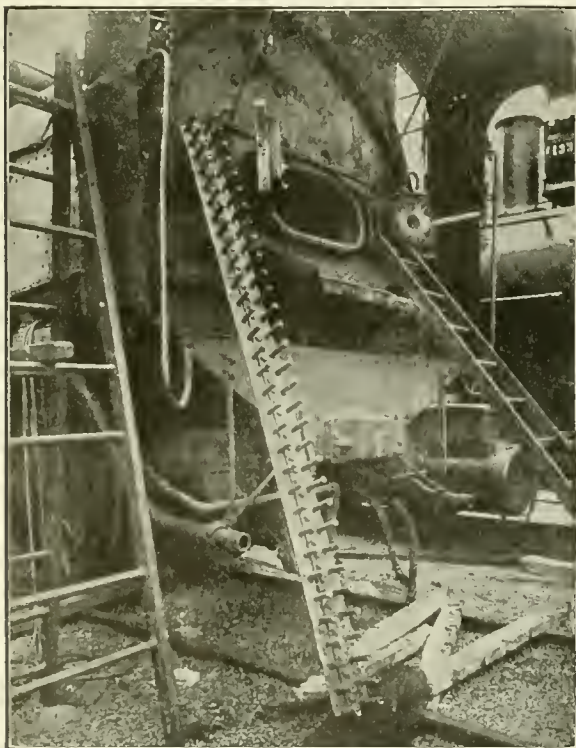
VIEW SHOWING ONE OF TWO PIECES CUT FROM SIDE SHEETS OF BOILER, PREPARATORY TO WELDING IN NEW PIECES BY OXY-ACETYLENE.
